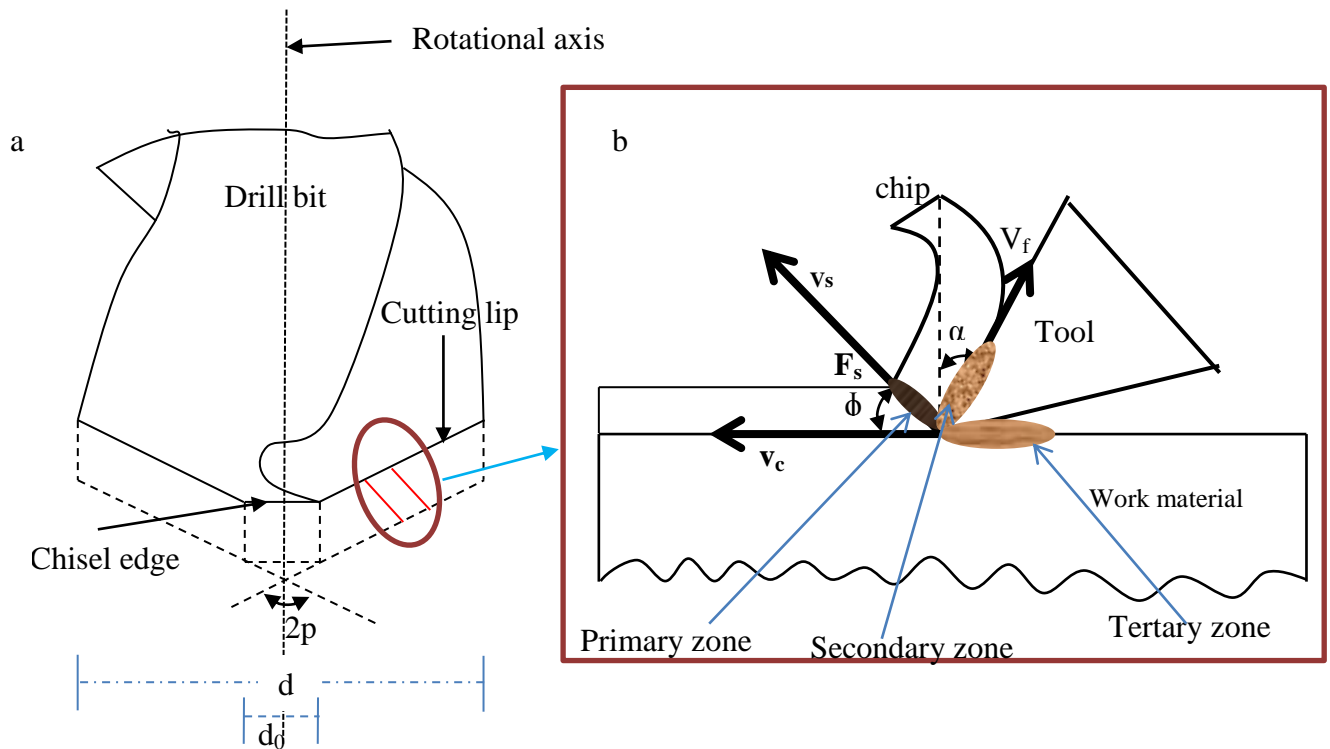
Schematic design of drilling: (a) work-piece element with cutting wedge, (b) Heat caused zones
